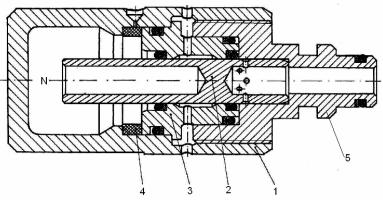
Safety valve with nitrogen: 1- valve body; 2- piston; 3- valve sleeve; 4- sealing ring; 5- fixing cover
